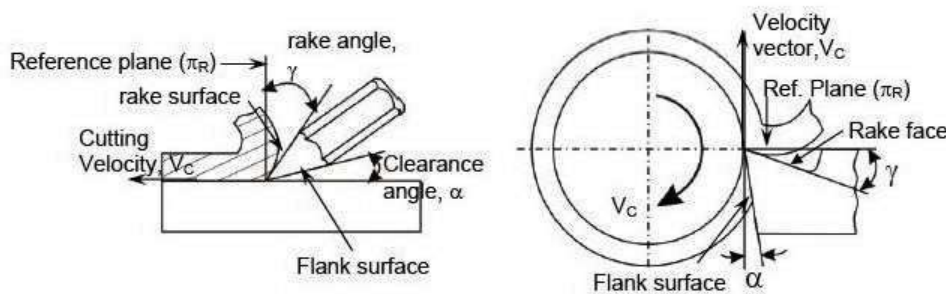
Rake and clearance angles of cutting tools [3]
